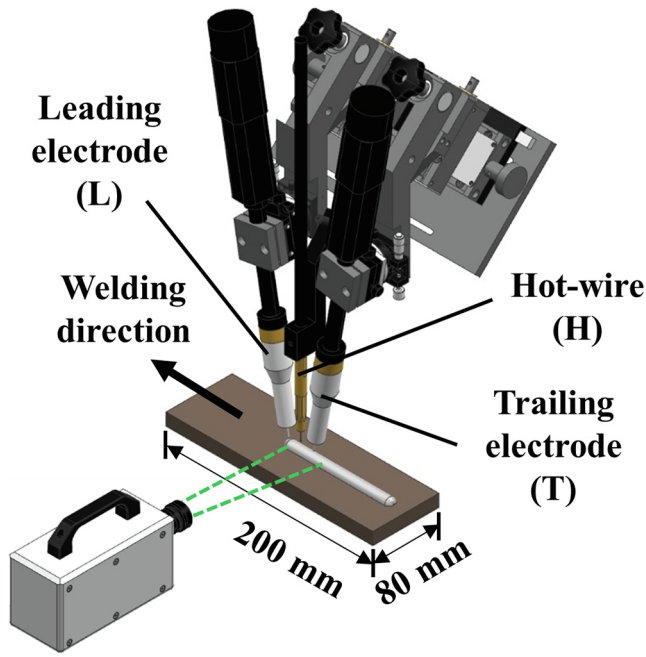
Schematic of the welding experiment of the H-tandem process.
